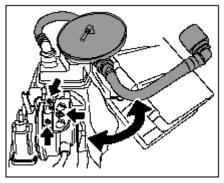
Pressure control valve and leakage diagnosis pump mount Courtesy of PORSCHE OF NORTH AMERICA, INC.
